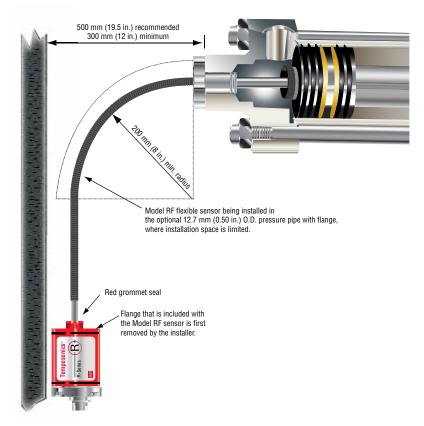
Installation example using optional 12.7 mm (0.50 in.) O.D. pressure pipe inside hydraulic cylinder
